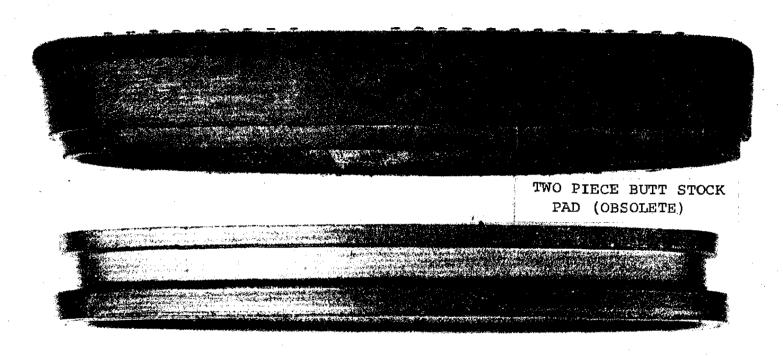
shows two types of buttstock pads, the two piece pad was replaced by a one piece pad
